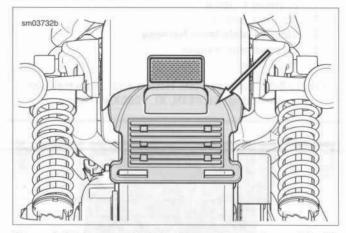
License Plate Holder and Lamp Assembly: XL 883N, XL 1200X/V (HDI)
